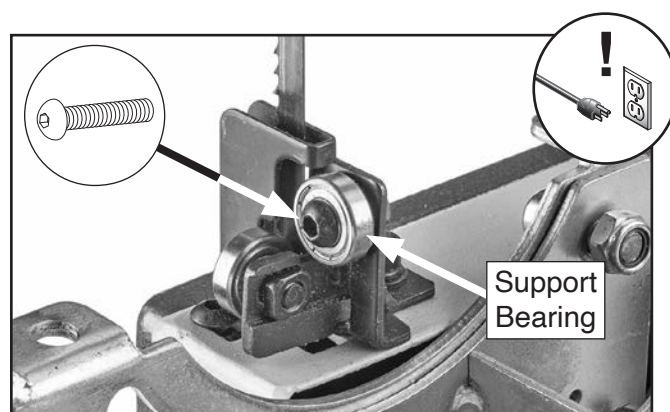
Bearing positioned 0.016" away from back of blade.
